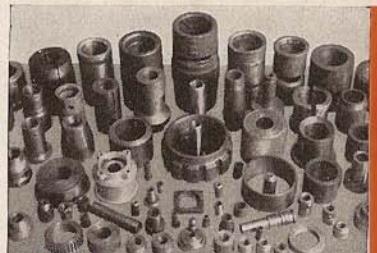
Typical Bushings which you can Make in the "Workshop" Lathe.
